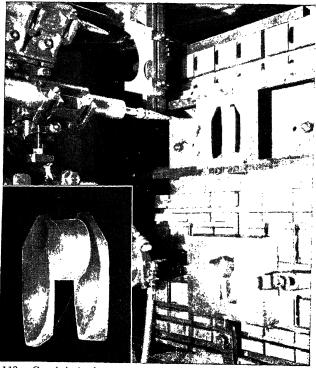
Crankshaft die by the two-template method—close-up of lead impression. After dies are machined, molten lead is poured into the recess and allowed to harden to test the die. (Keller.)
